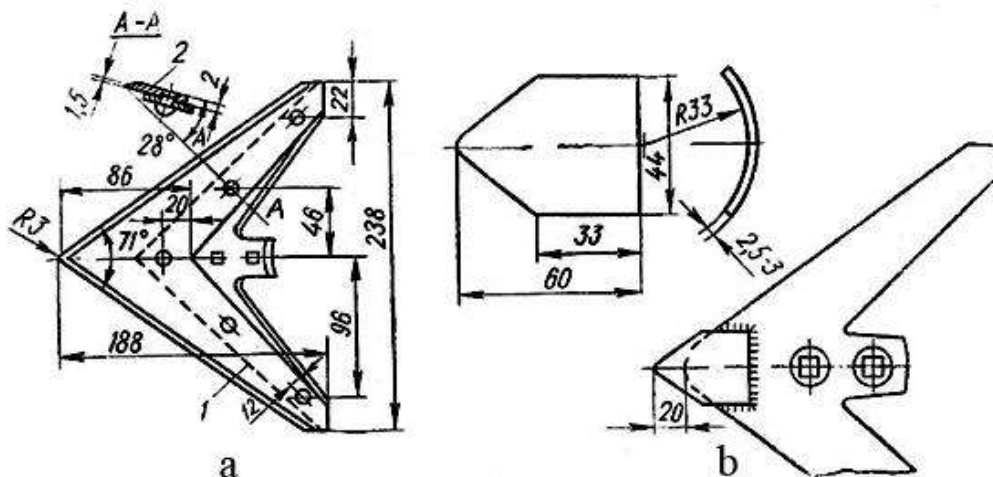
Recovery of hoes: a – by fitting detachable blades;
